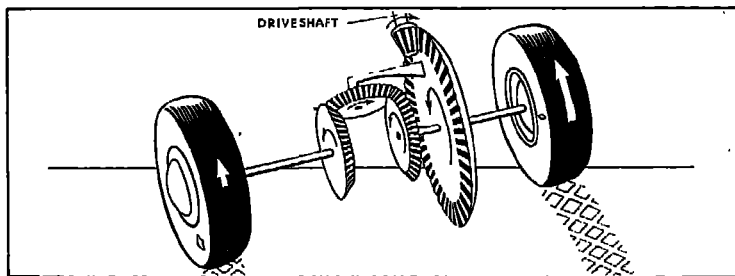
This differential drawing shows the cogs or gears substituted for the "sticks" in Figure 162, and with drive-shaft pinion and ring gear in place. The ring gear is free to rotate on the axle shaft and does not drive it except through the differential gears.
